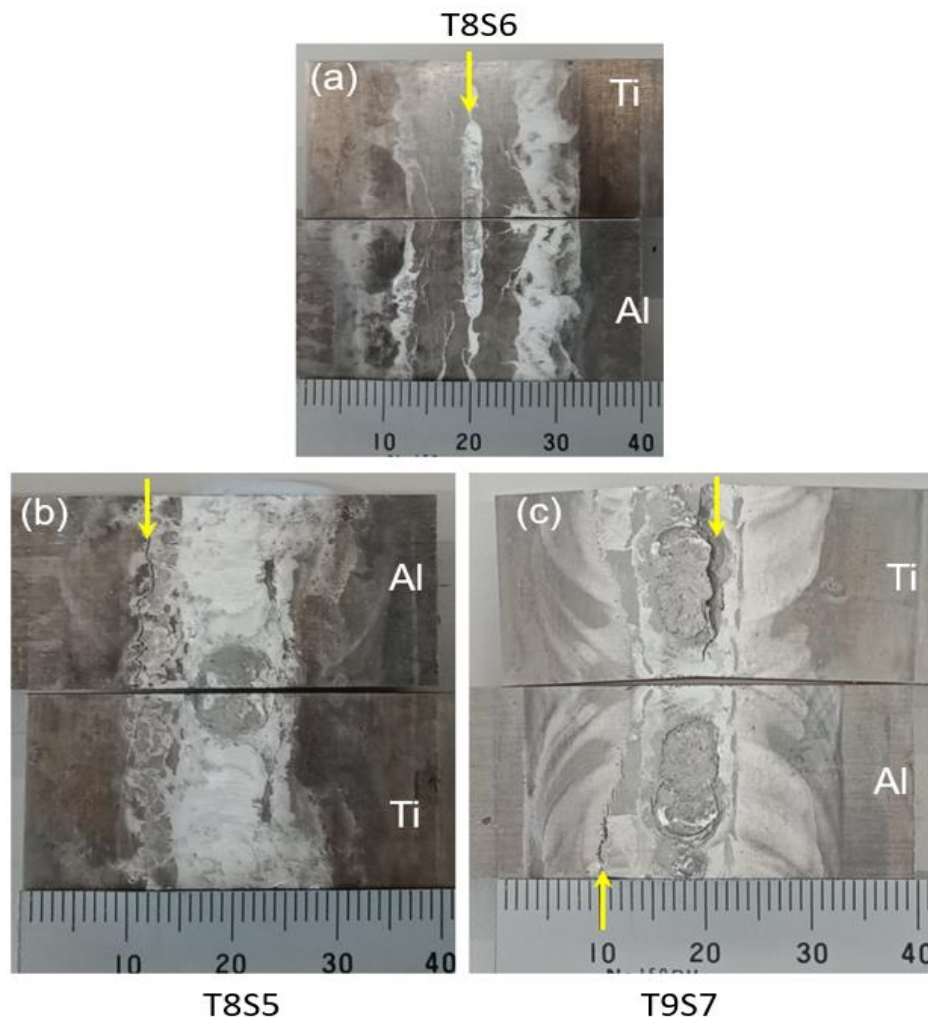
Fracture samples: (a) A long narrow penetration, (b) A less penetration with more penetration on one end of the weld sample, (c) More penetration and about 10 per cent non-penetrated at the other end of the weld sample.
